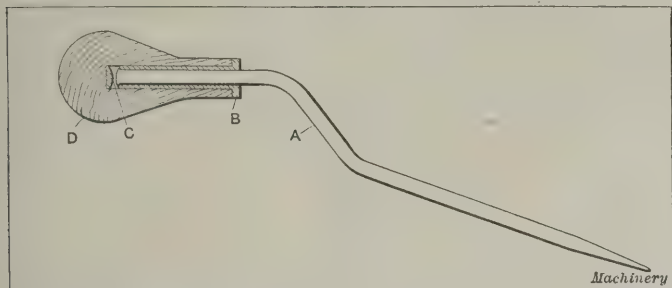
A Revolving-handle Screw Driver for Rapid Assembling of Work
